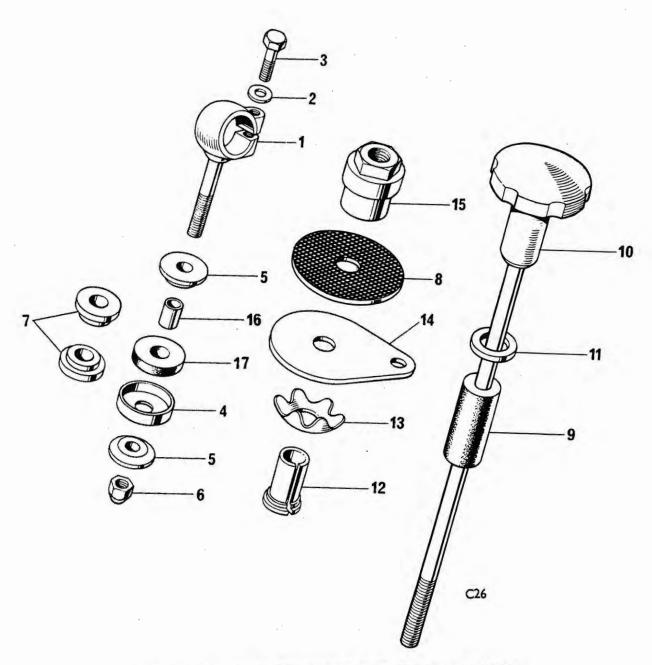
HANDLEBAR MOUNTINGS AND STEERING DAMPER
